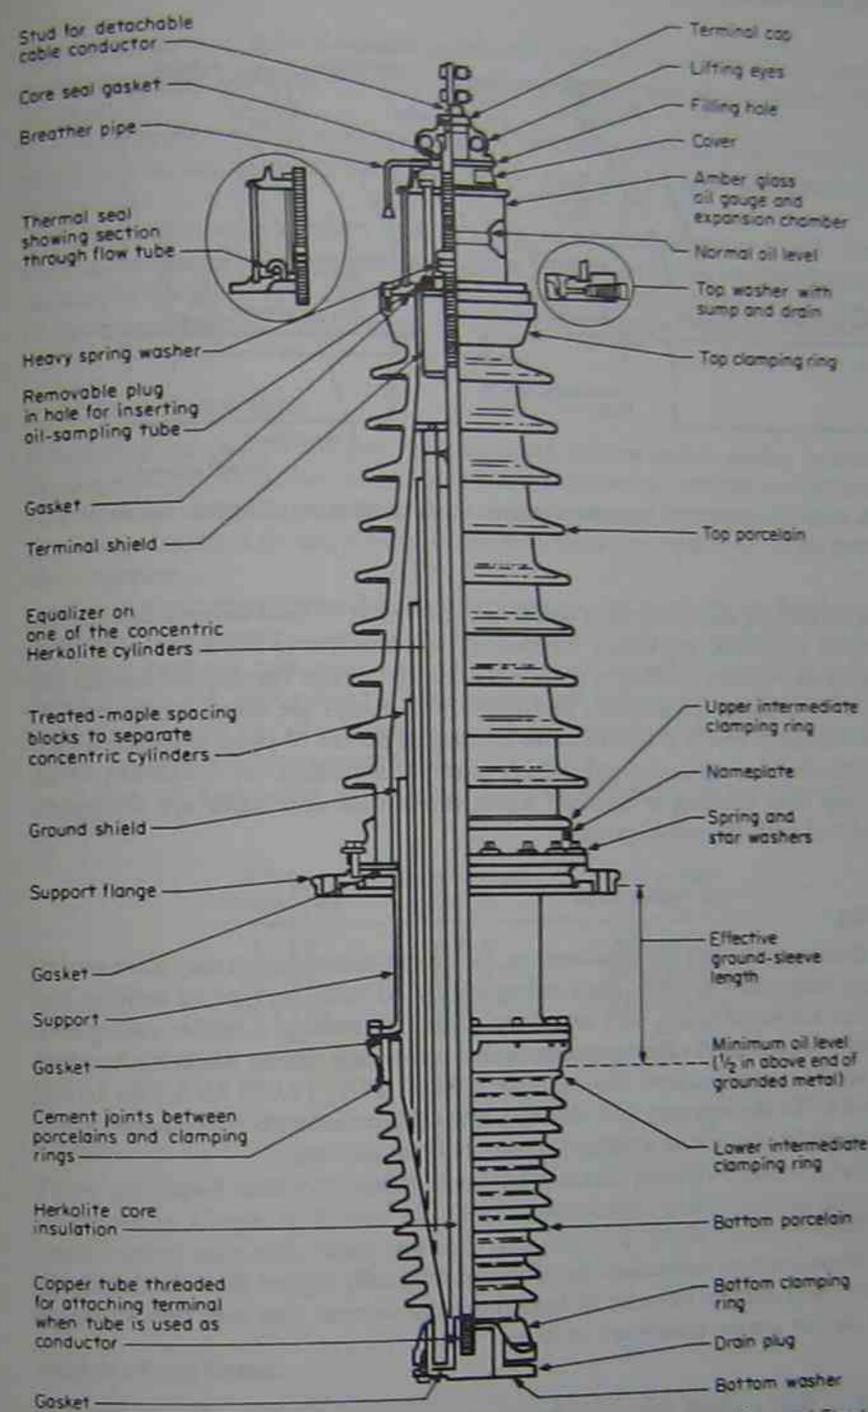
Typical oil-filled bushing for a 69-kV transformer. (Courtesy General Electric Co.)
